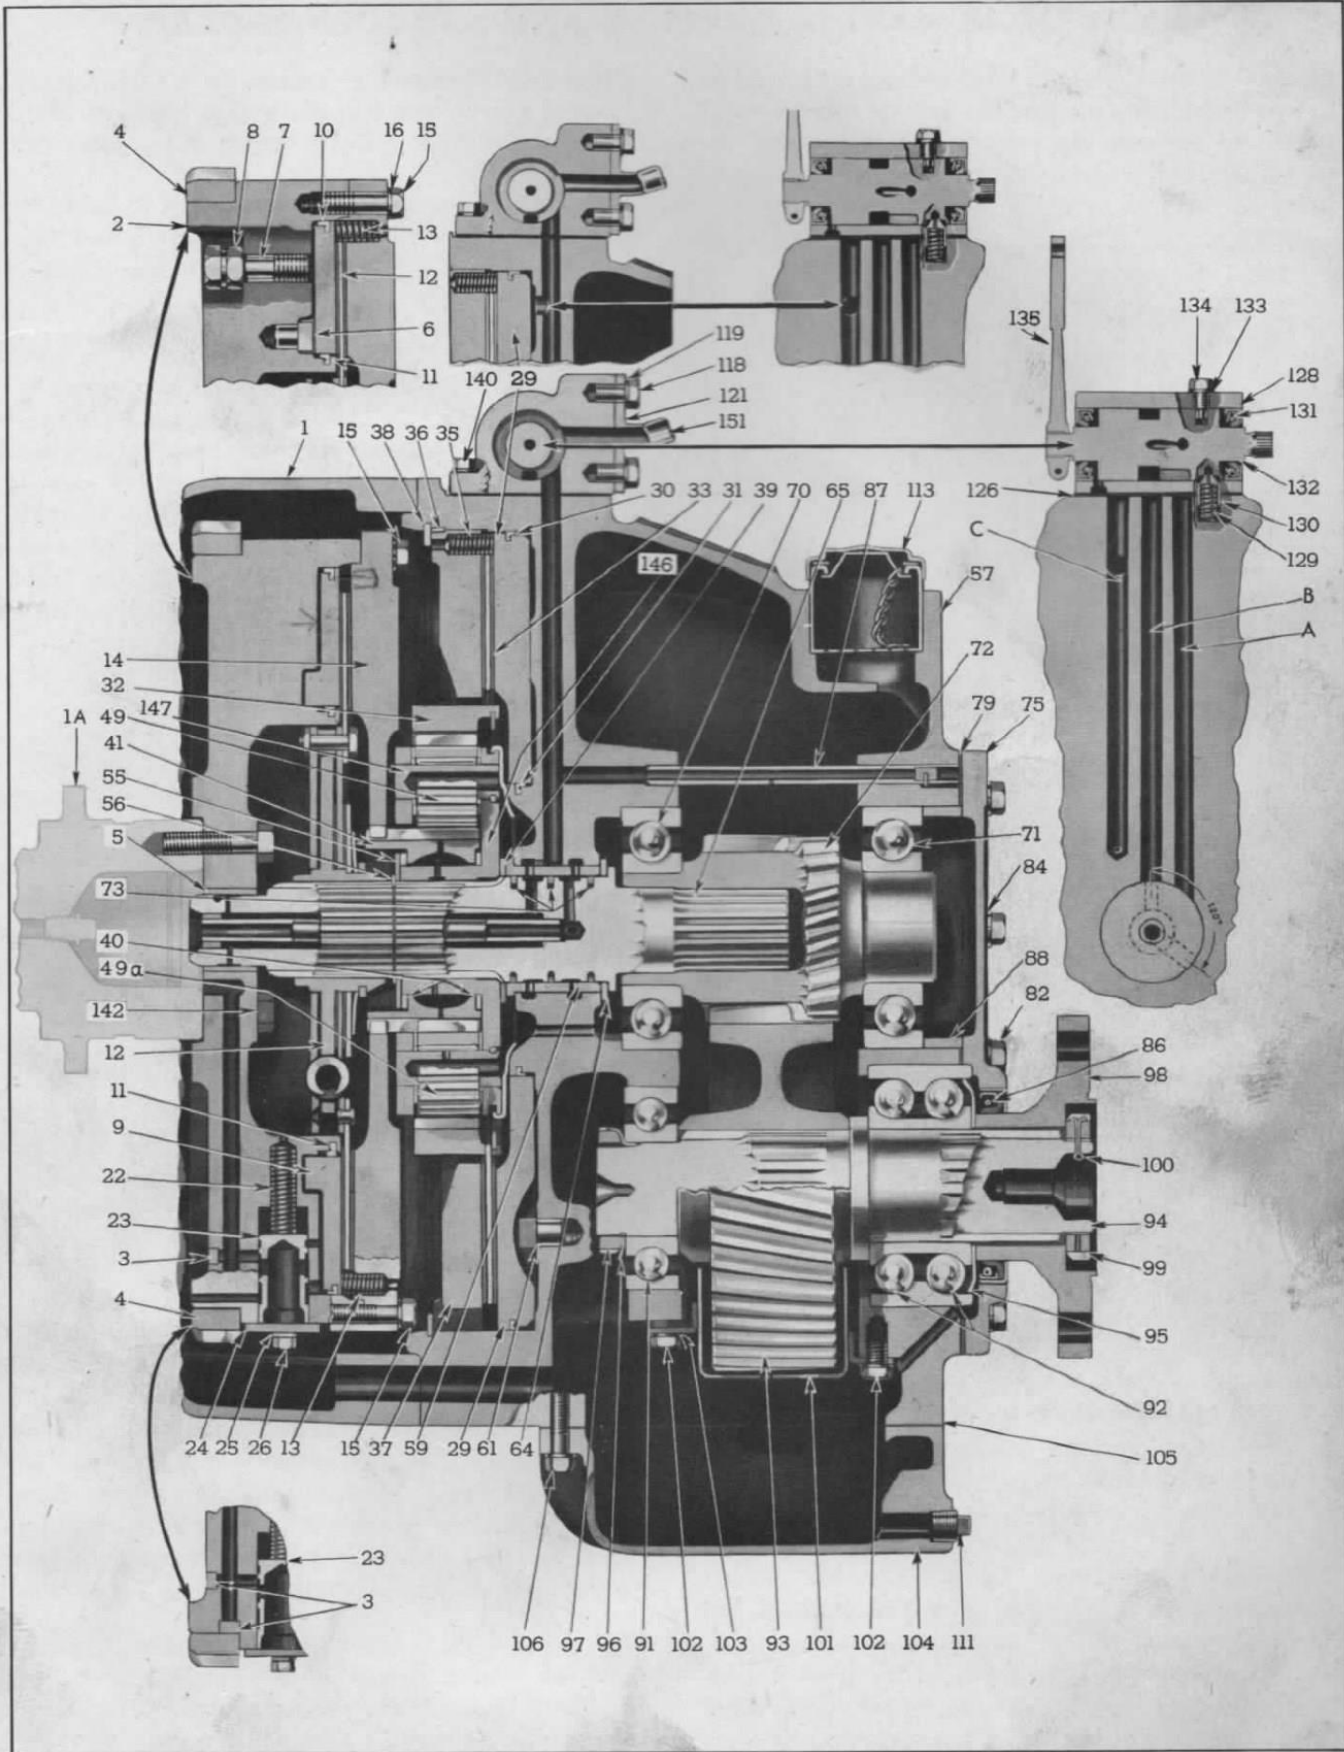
Side Cross Section of Hydraulic Marine Reverse and Reduction Gear
